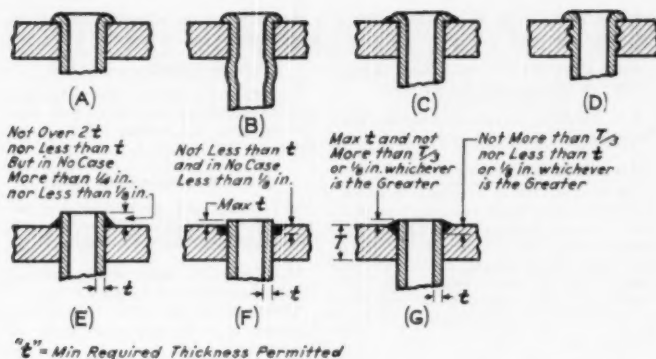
ACCEPTABLE FORMS OF TUBE ATTACHMENT ON FIRE-TUBE BOILERS
